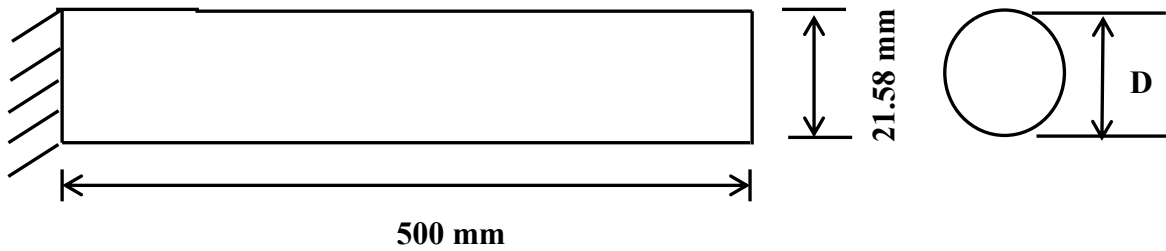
Sketch of uniform cantilever beam of circular cross-section
